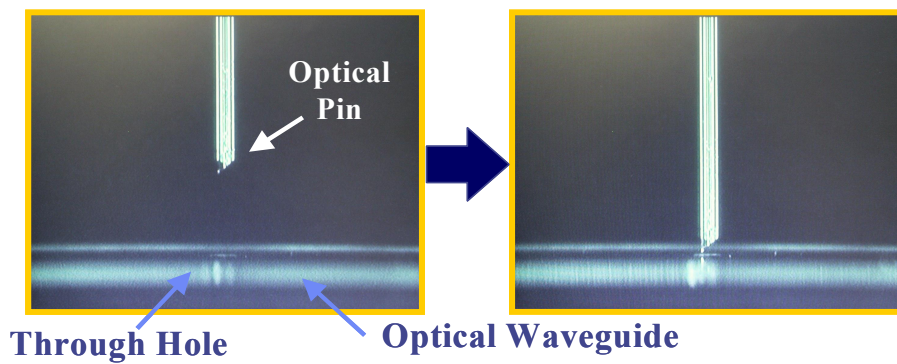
Photographs when an optical pin is being inserted into a hole.
